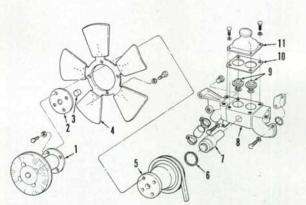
Exploded view of thermostat housing and fan drive assembly used on all models.
